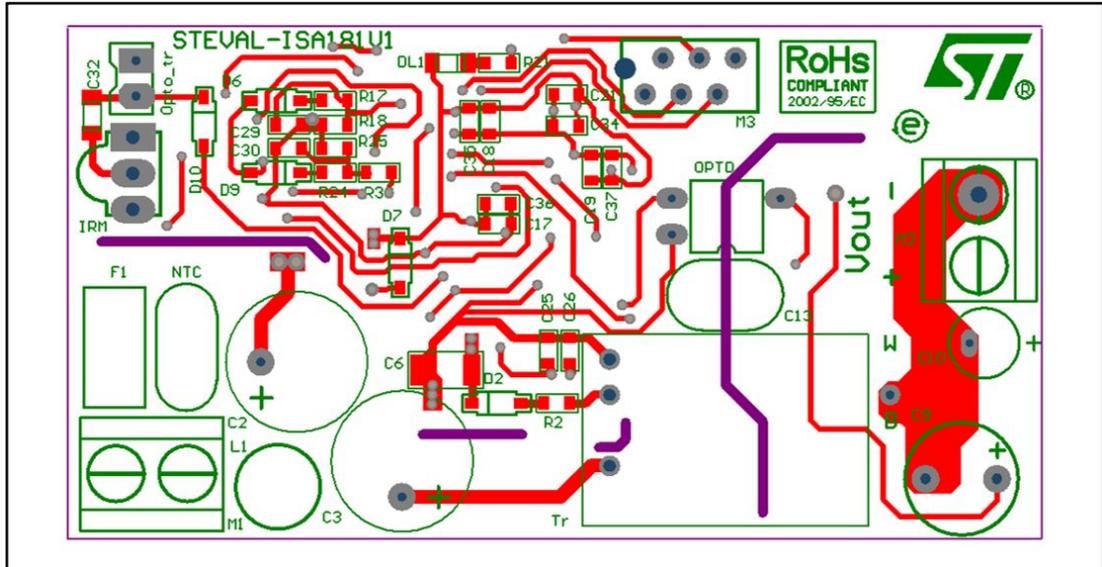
SMSF board layout: bottom layer + mirrored top overlay
